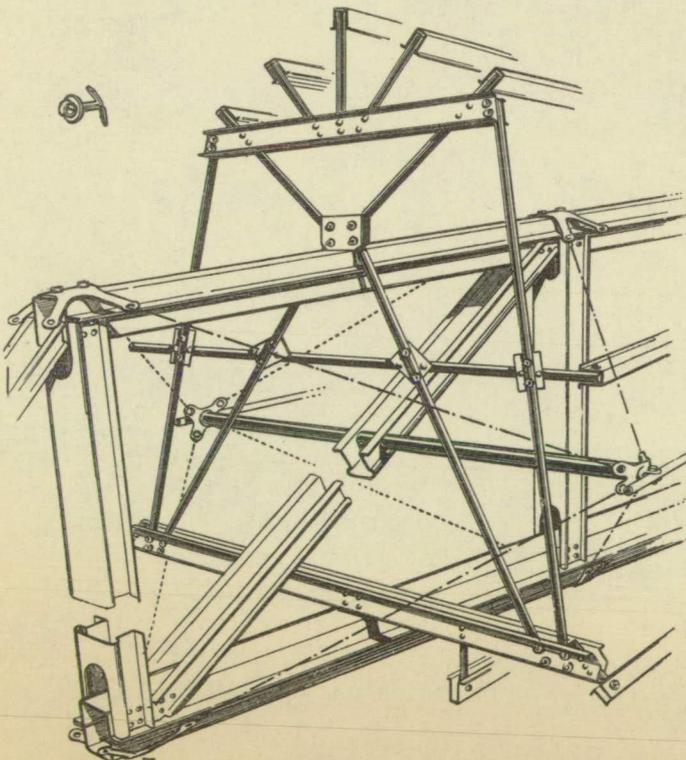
The fuselage girder. Sketch showing details of the girder and the torsion bracing, etc. The photograph Figure 13 should be examined in conjunction with the sketches in Fig.12. (Flight Sketch)
